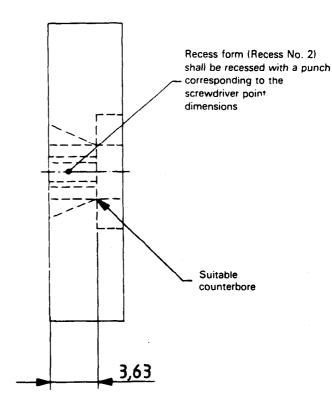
Torque-testing die for bits for cross-recessed head screws
